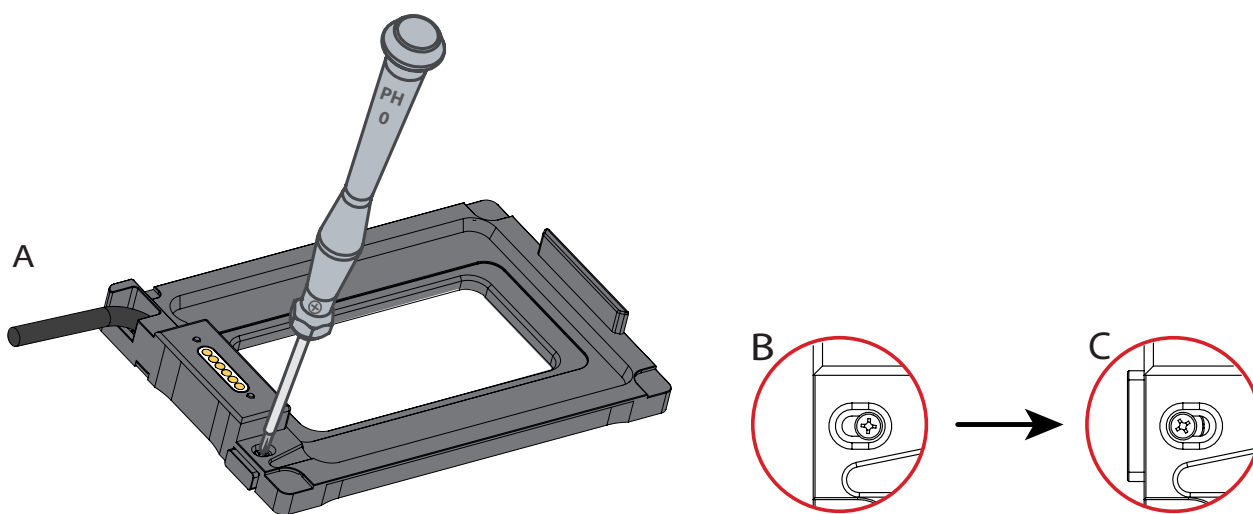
Clamping mechanism to fix the plate firmly inside the microscope stage. (A) Use a crosshead screwdriver PH0 to unlock the mechanism. Clamping mechanism (B) locked, (C) unlocked.
